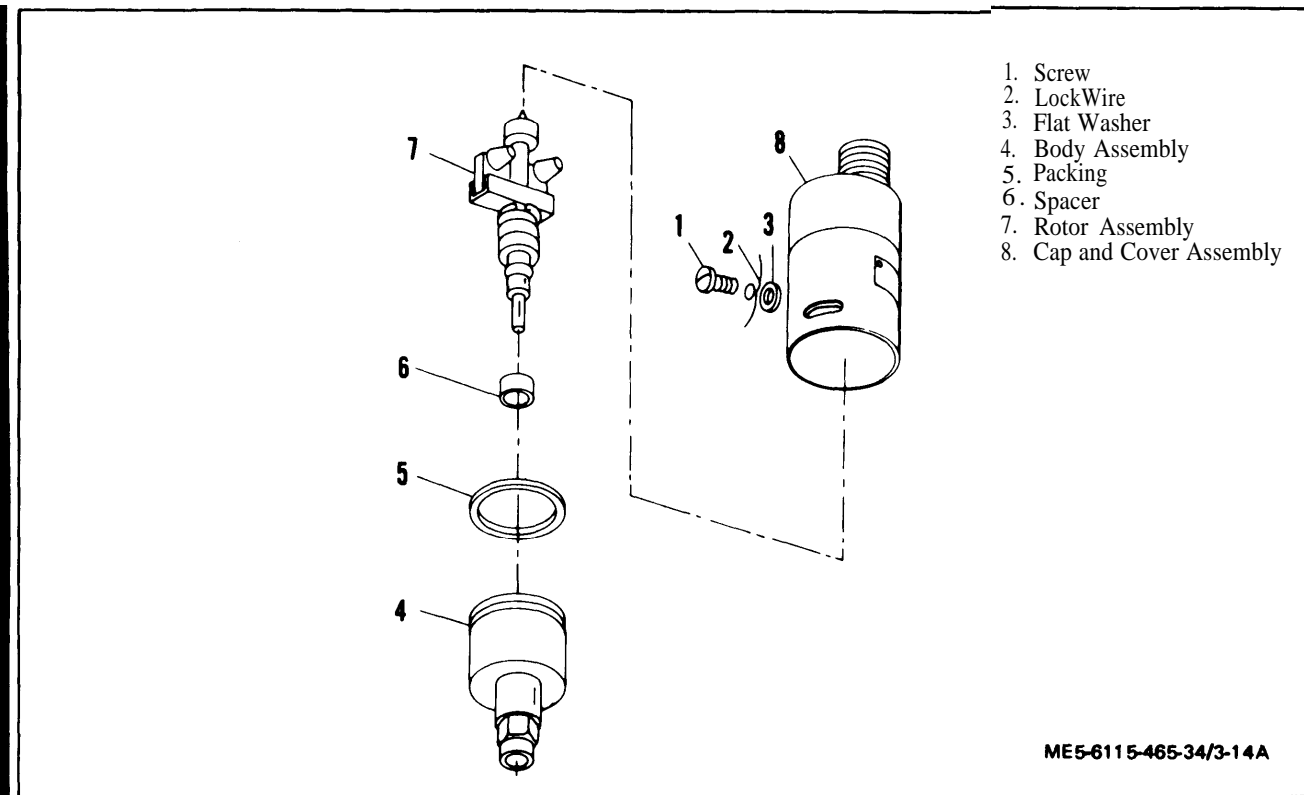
Speed Switch. Exploded View Effective with Serial No. RZ70001 and KZ027251 thru KZ027520
